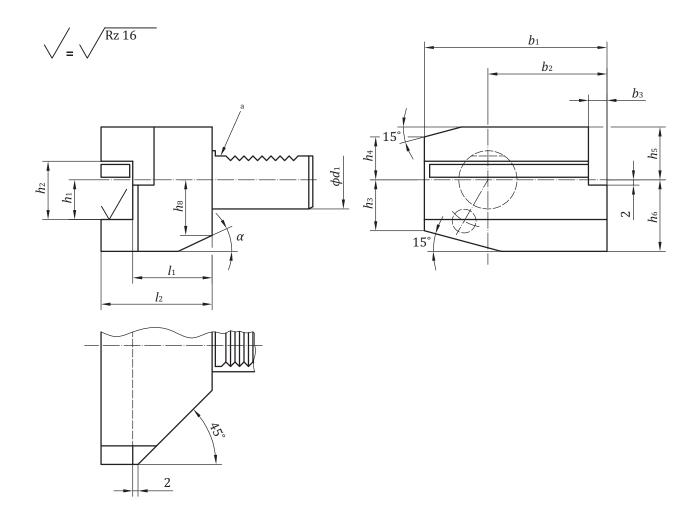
Type B3 tool holder, overhead, right-hand, short
